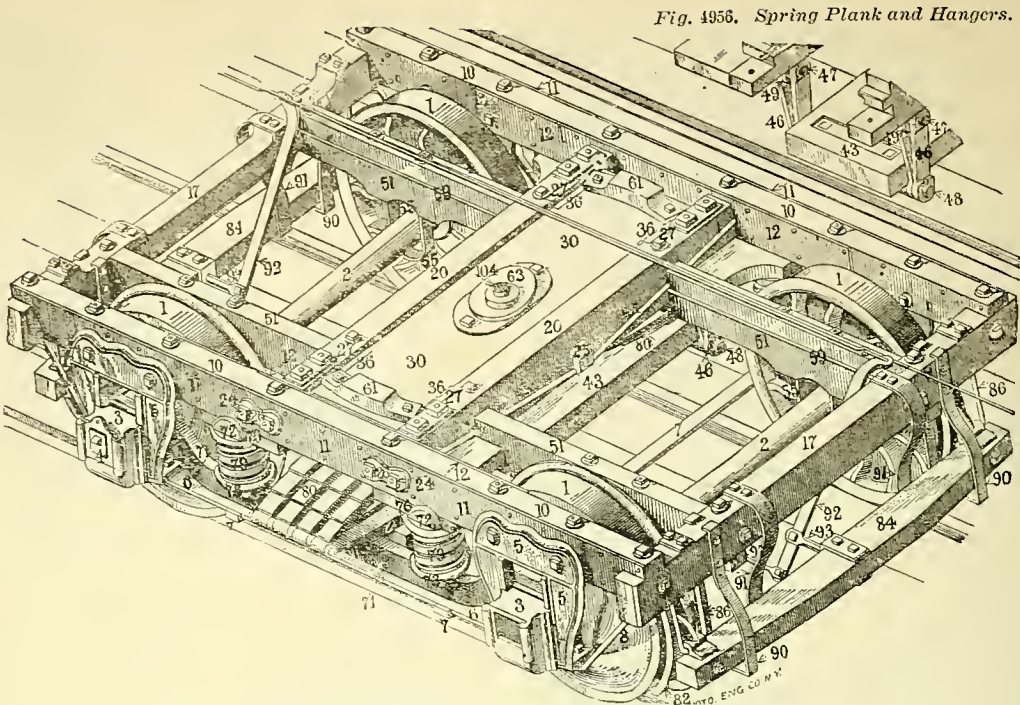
A PERSPECTIVE VIEW OF A FOUR-WHEELED TRUCK.
